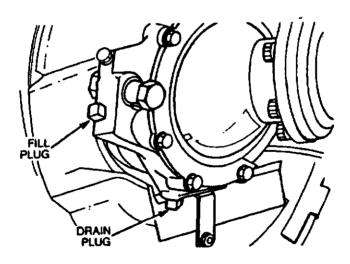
Swivel Pin Housing Drain and Fill Plugs
